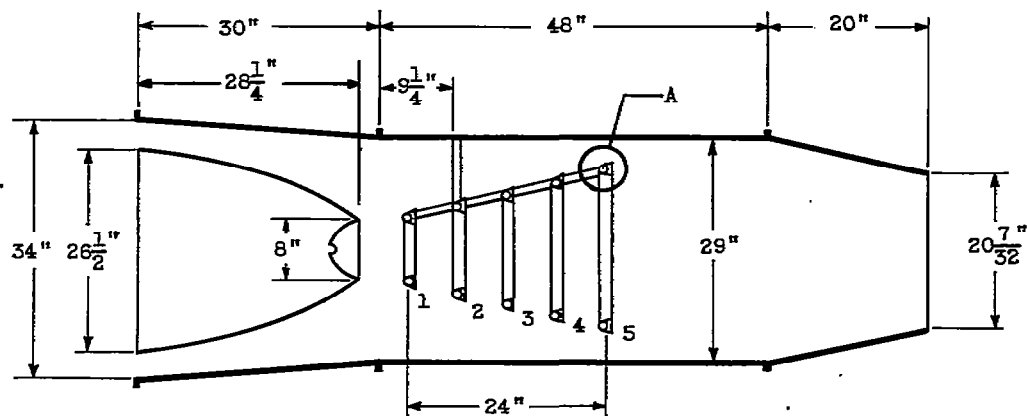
Cross section of tail-pipe-burner installation showing stations at which instrumentation was installed.
